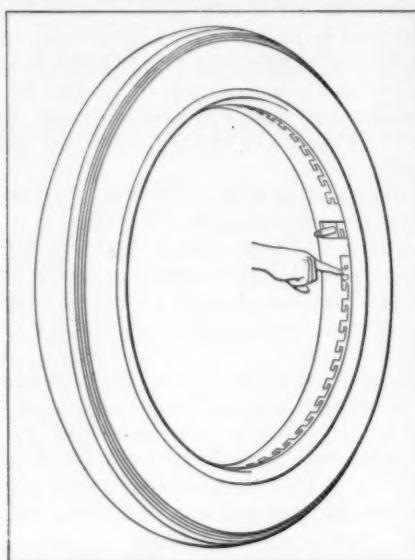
New Continental demountable rim, with bayonet joint locking device
